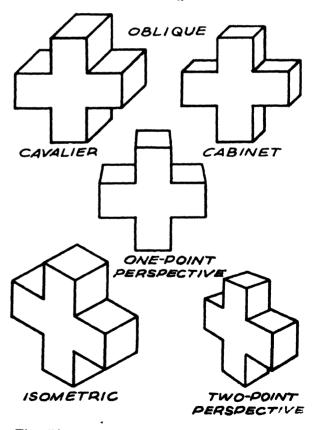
FIVE TYPES OF PICTORIAL DRAWING
